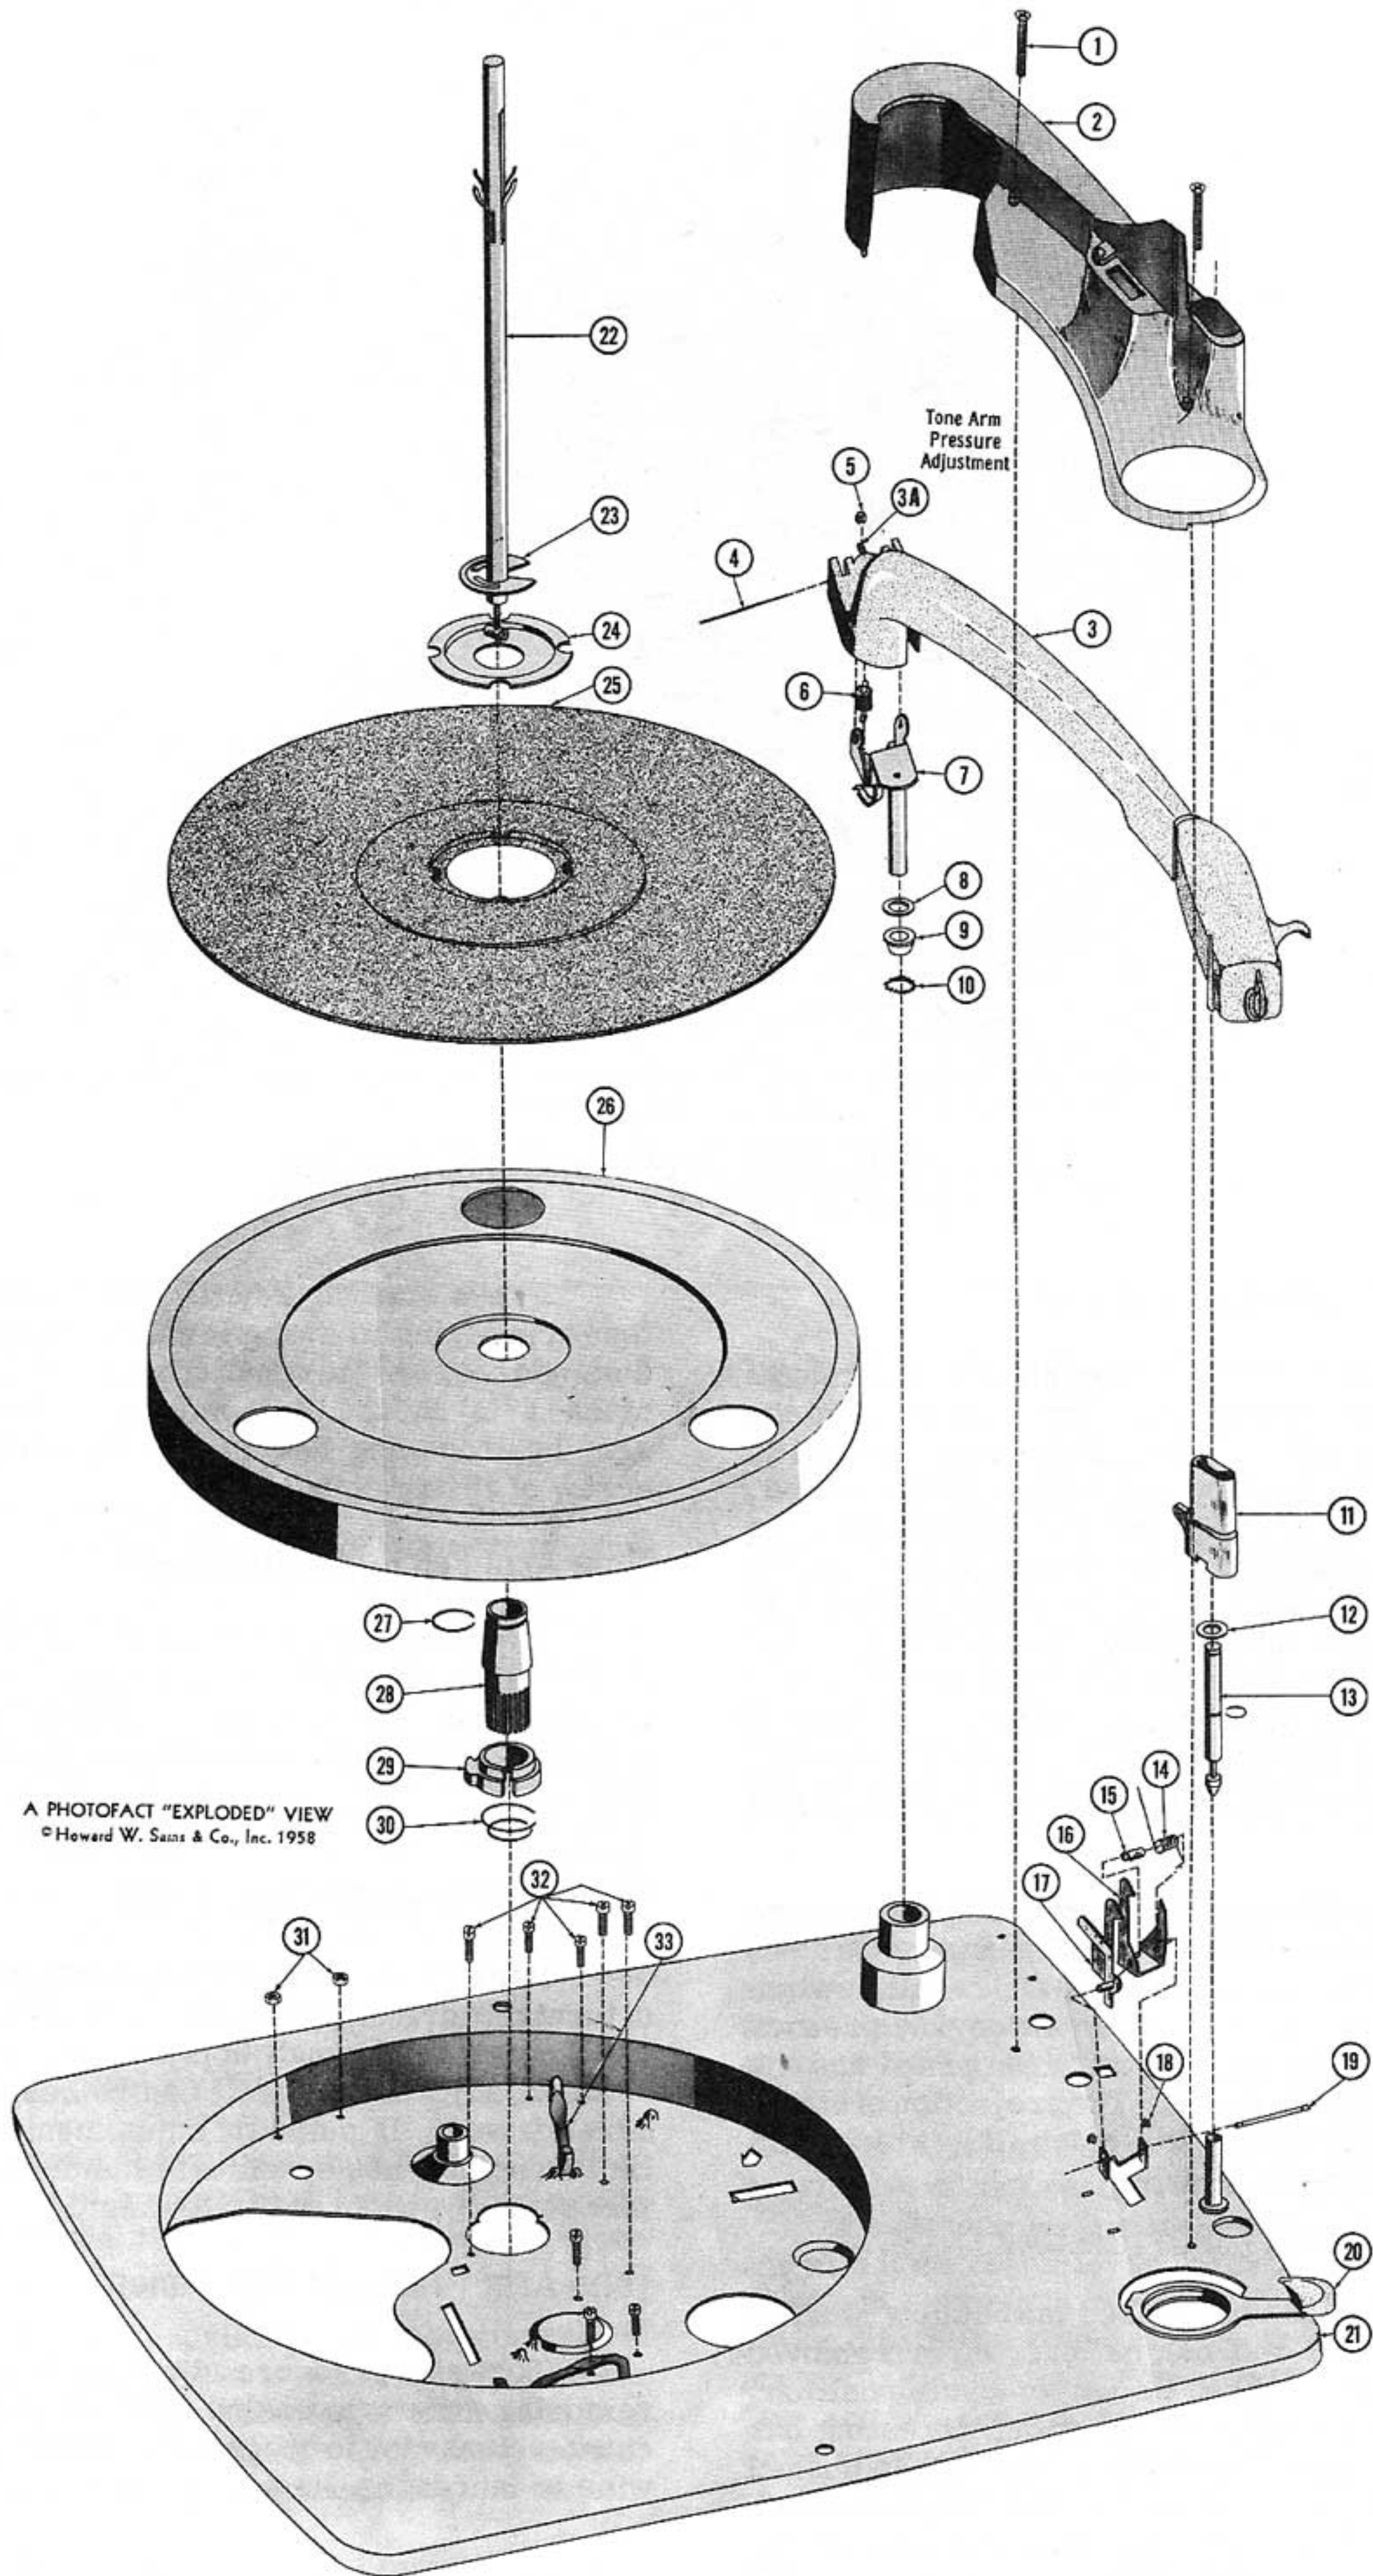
A EXPLODED VIEW OF PARTS ABOVE BASEPLATE
